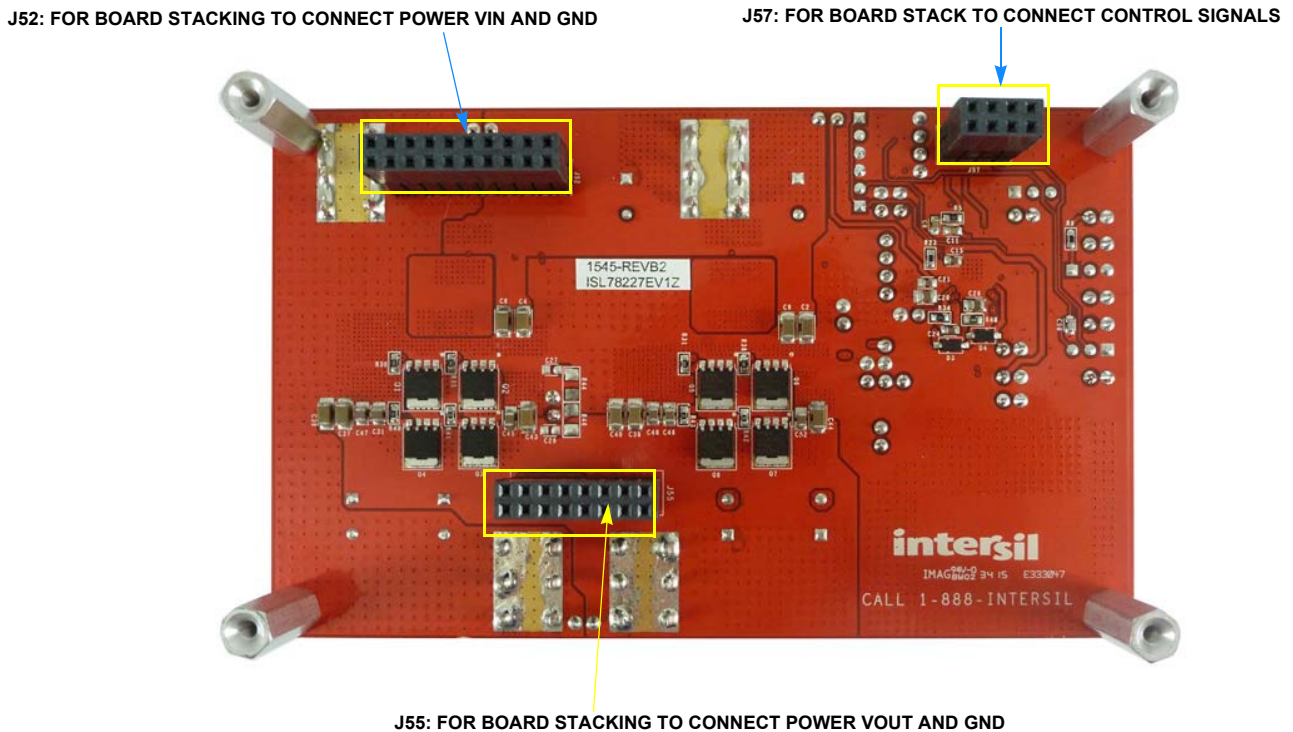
BOTTOM VIEW OF THE ISL78227EV1Z
